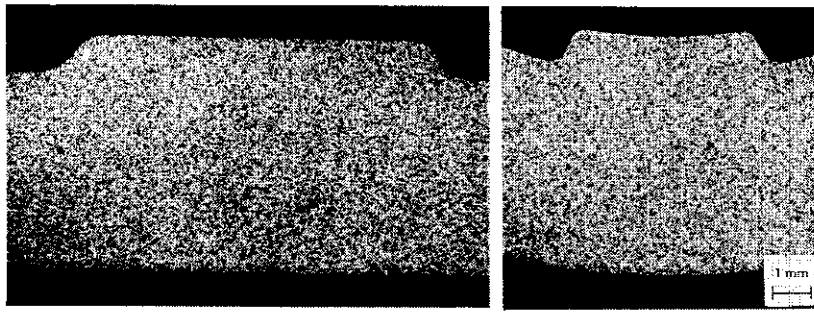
Views of specimens after flattening test (right) and flaring test (left)
